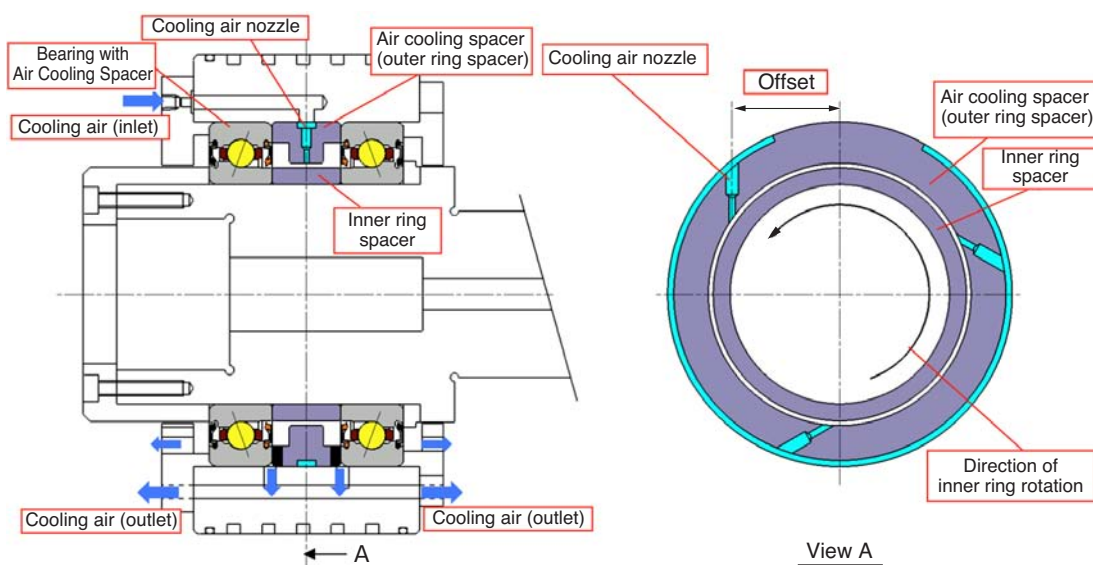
Machine tool main spindle bearings with air cooling spacer (for grease lubrication)
